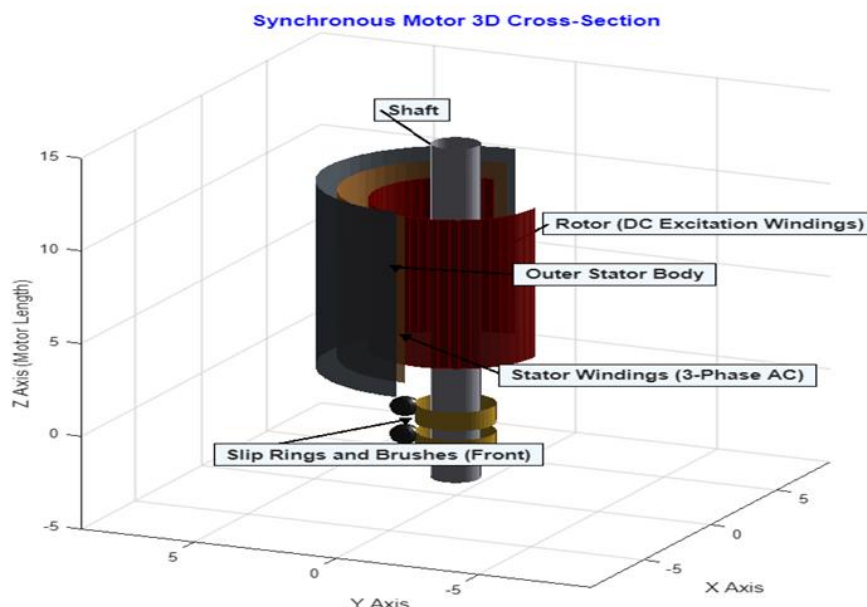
Three-dimensional cross-sectional view of a synchronous motor, showing the shaft, the rotor carrying DC excitation windings, the outer stator body, the three-phase AC stator windings, and the front slip-ring and brush assembly. [Source: Generated by the author using MATLAB].
